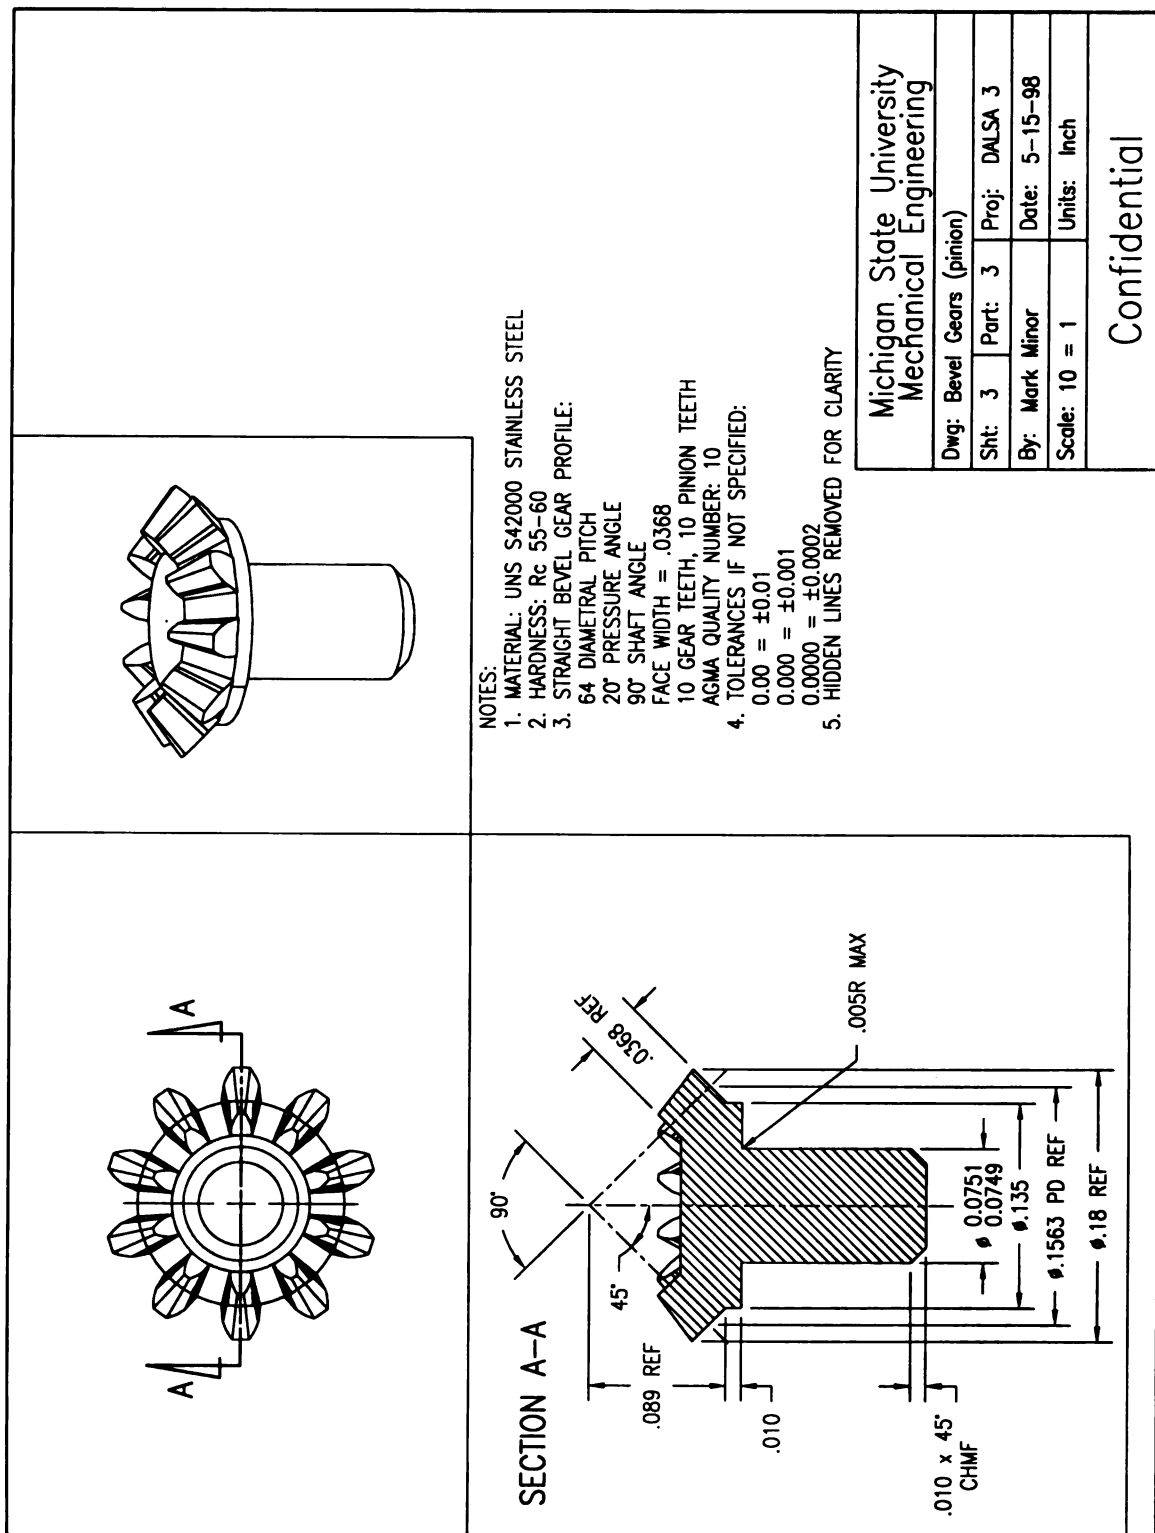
DALSA Component: Bevel Gear Pinion (sheet 3).
